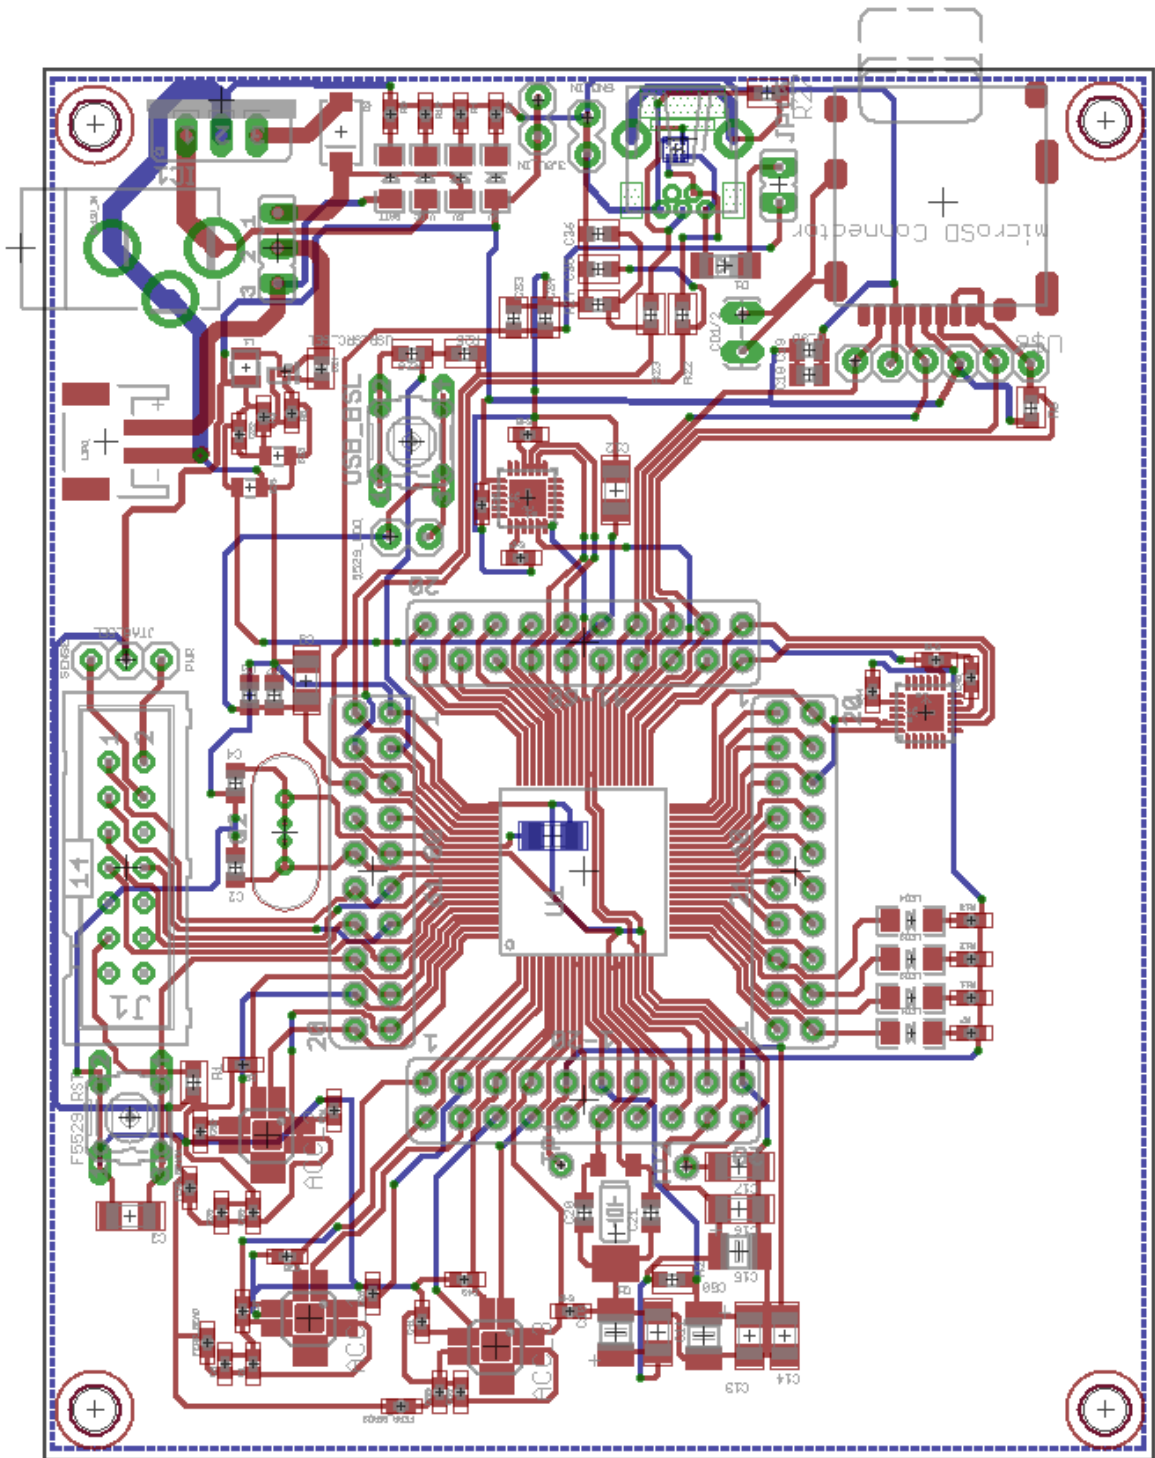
BBTE\_FIX\_V01 PCB – top and bottom copper
